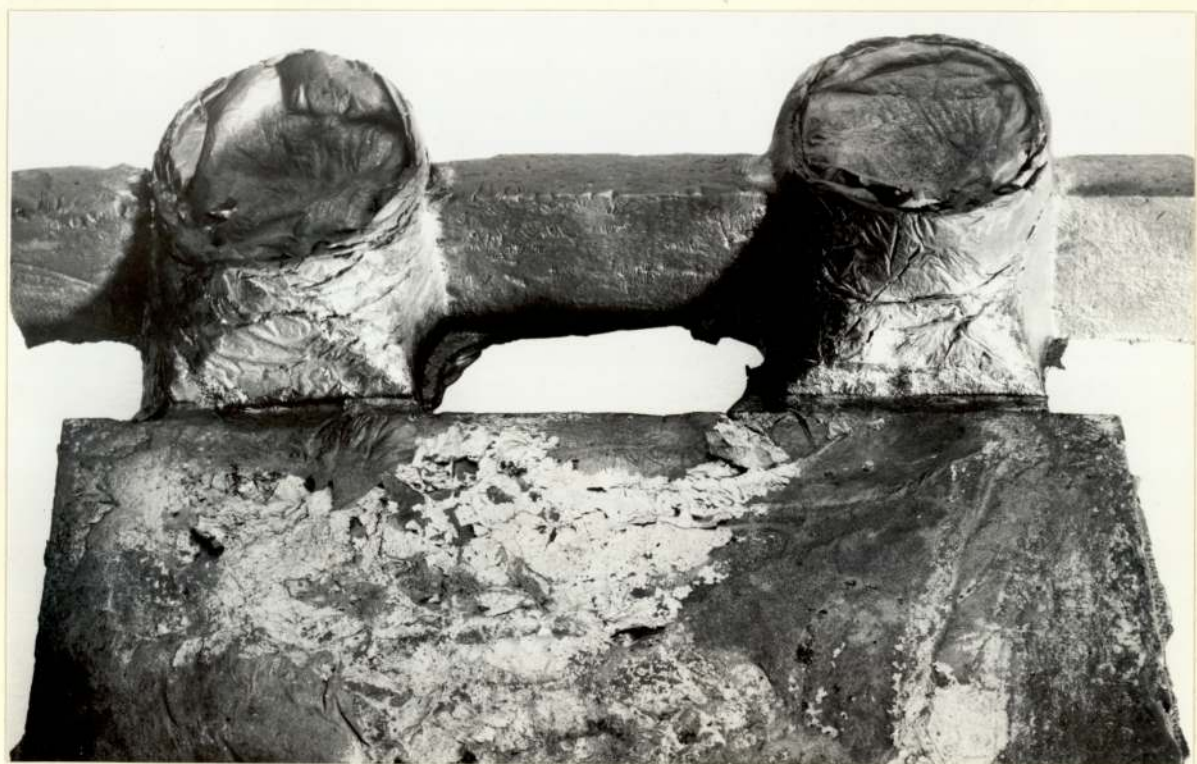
2.5 cm plate casting produced from silica shell mould illustrating graphite film on top surface.
